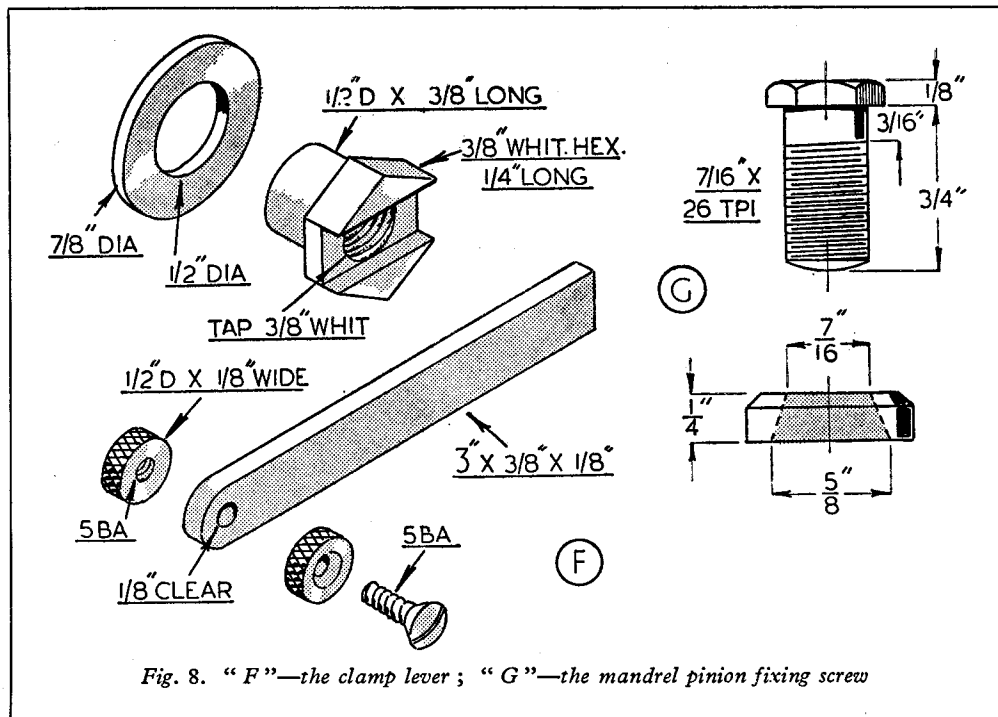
"F"—the clamp lever; "G"—the mandrel pinion fixing screw
